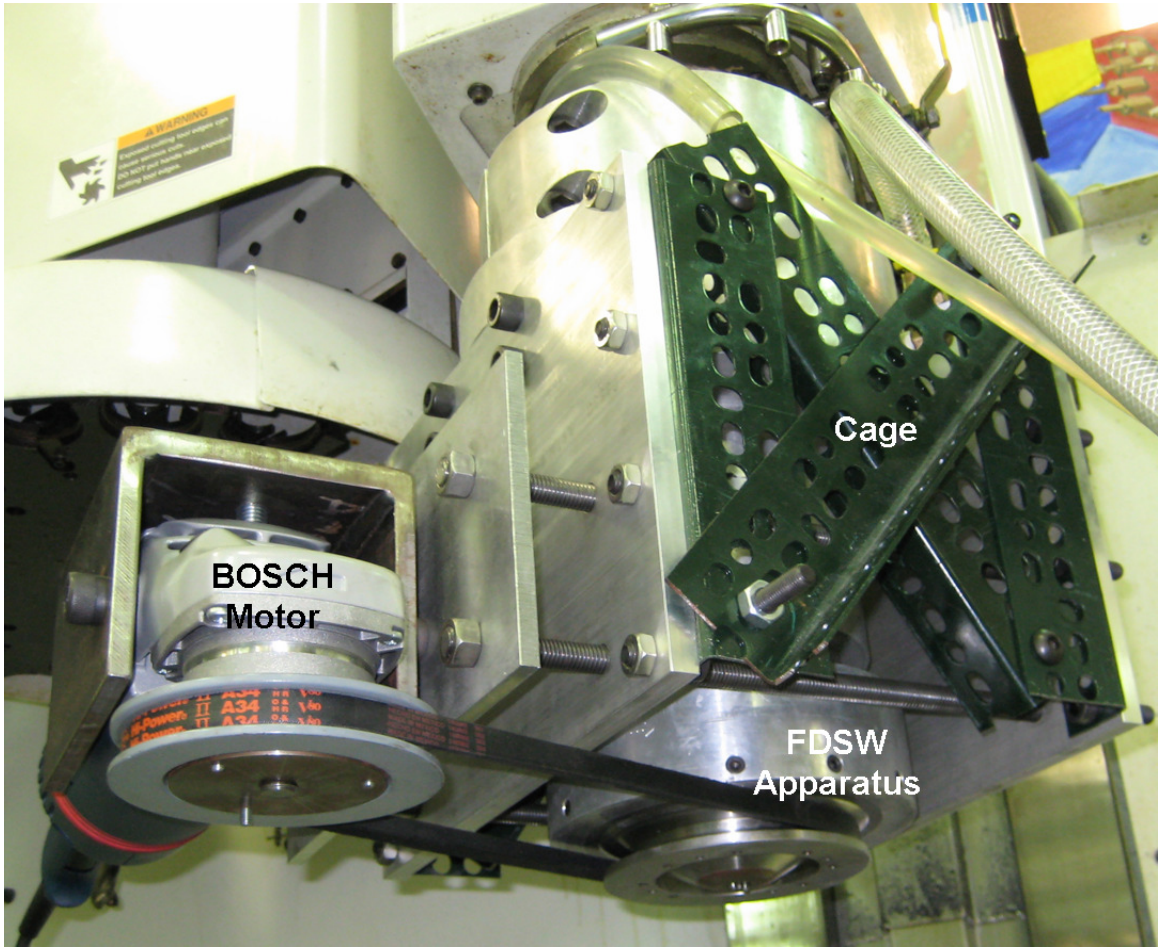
An image of the modified friction driven stitch welding apparatus with Bosch grinder motor.
